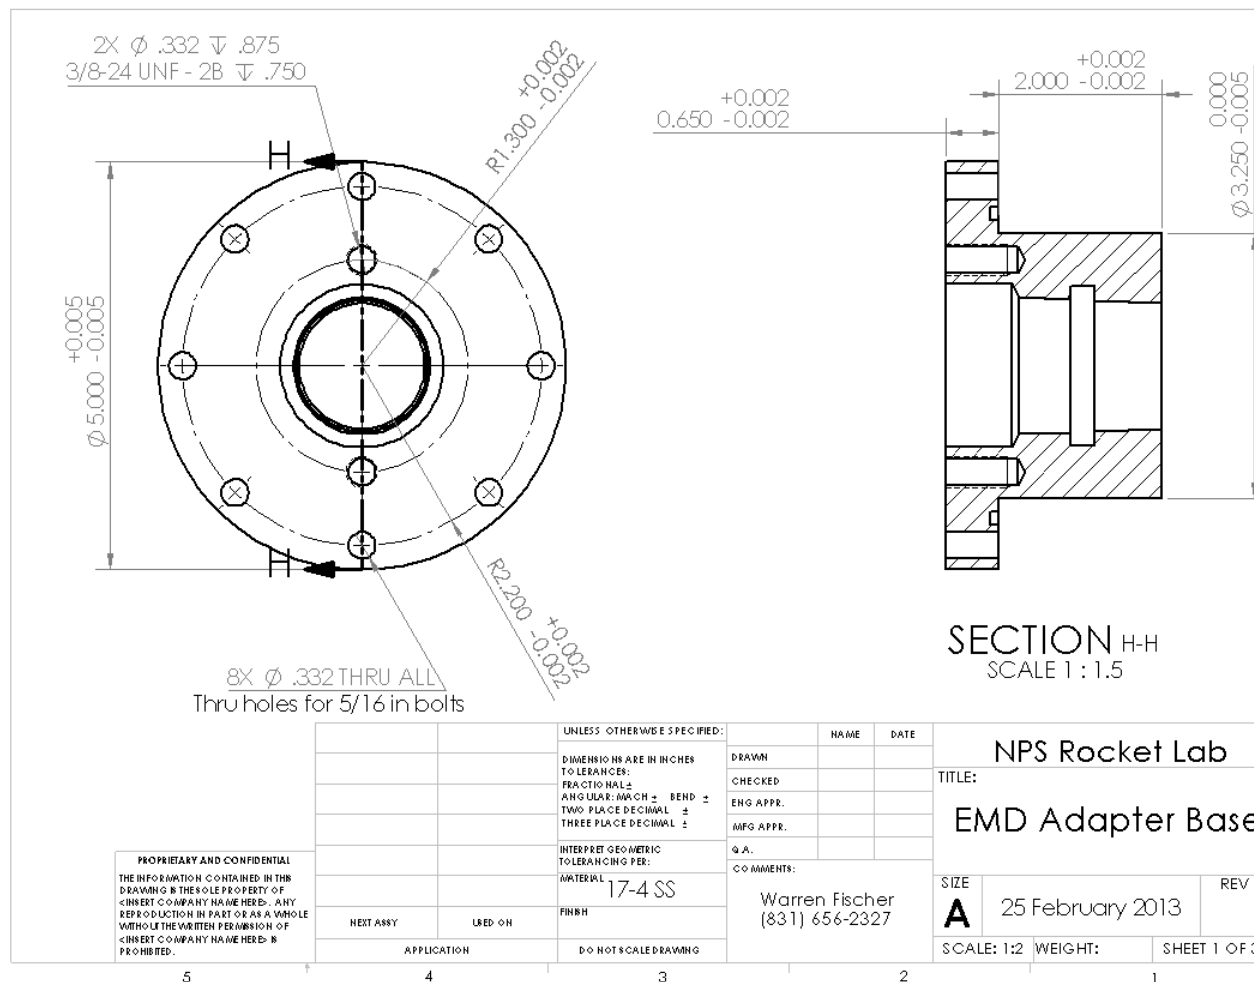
EMD Injector Adapter Fabrication Drawing (Page 1 of 3)
